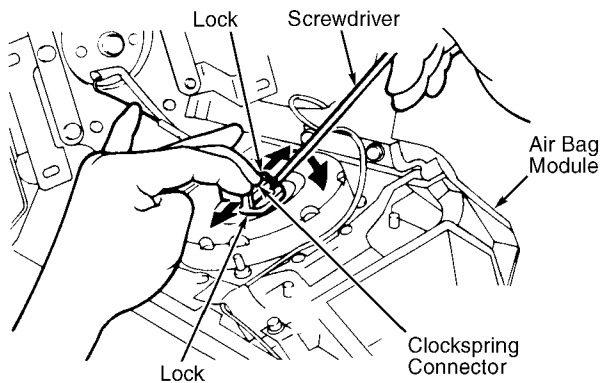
Disconnecting Clockspring Connector (3000GT)
